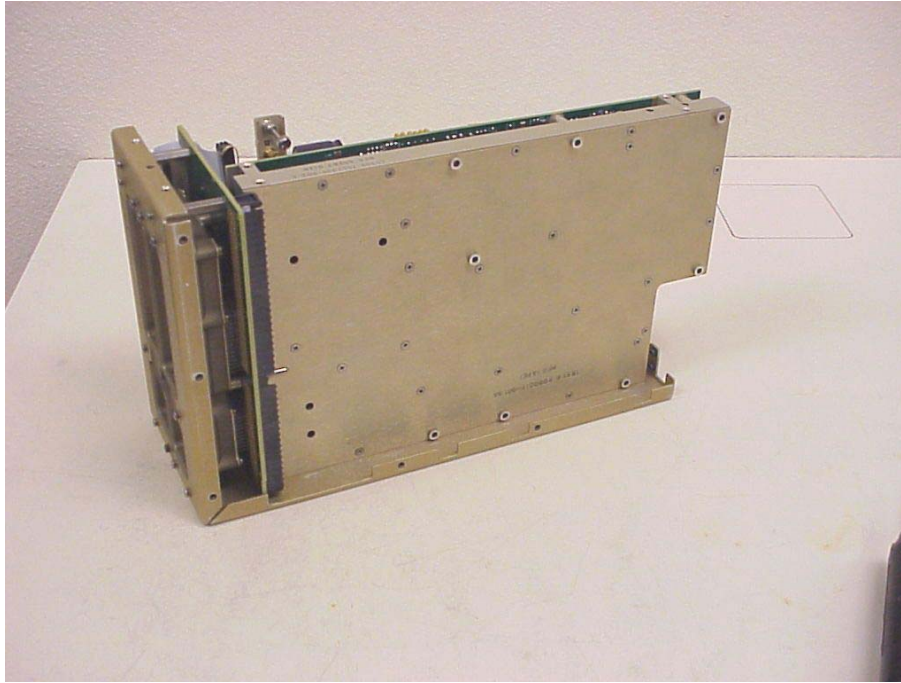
View of 4 MCU Unit Side, With A5 Receiver Removed
